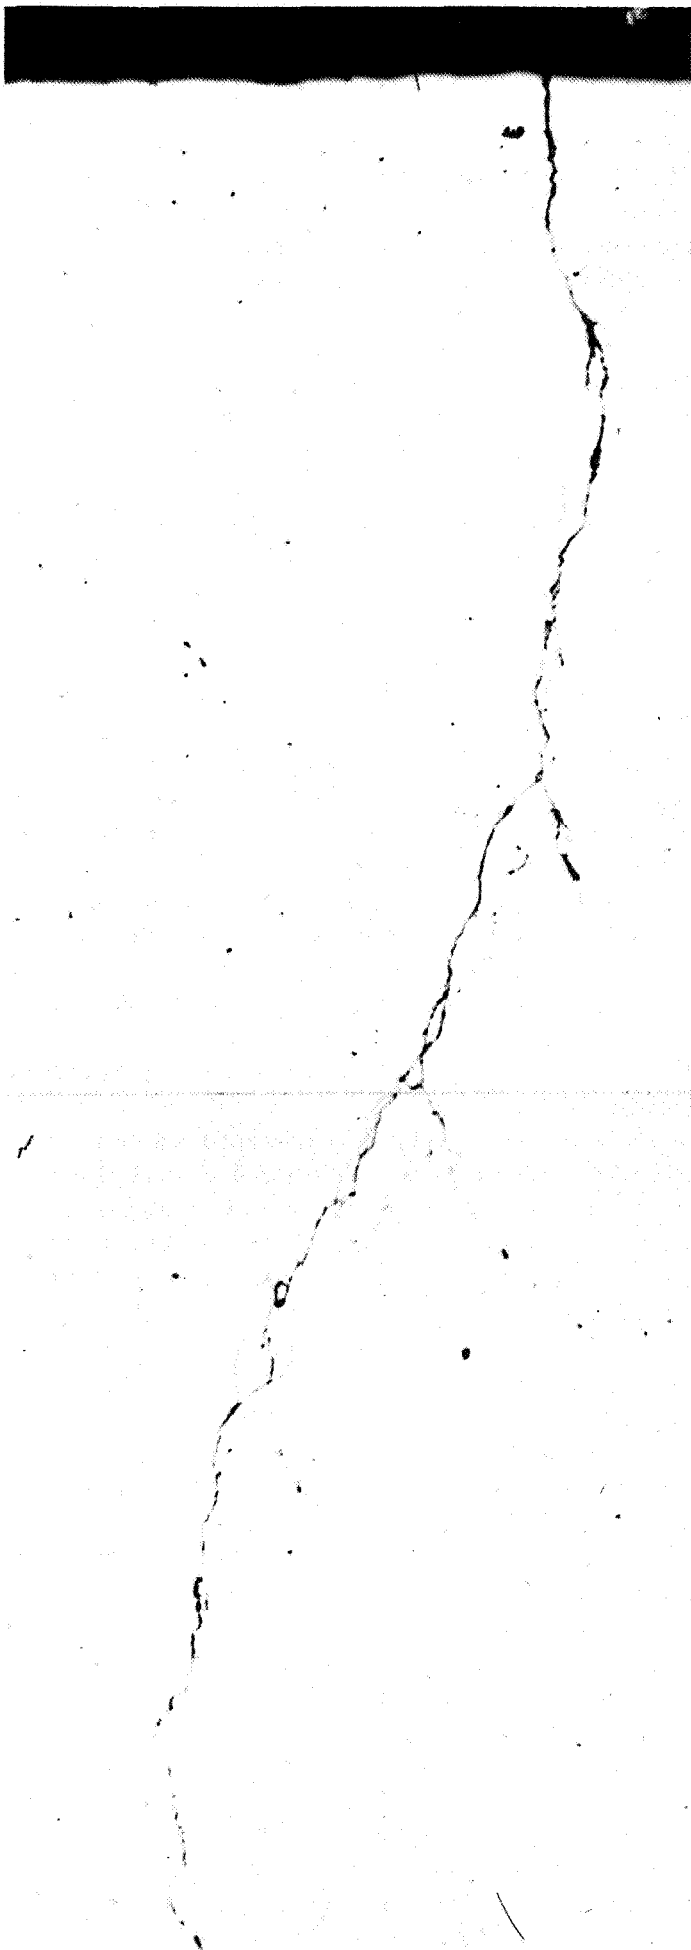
Path of the crack through the 2.1-mm. wall of the Type 304L tubing. 100X.
